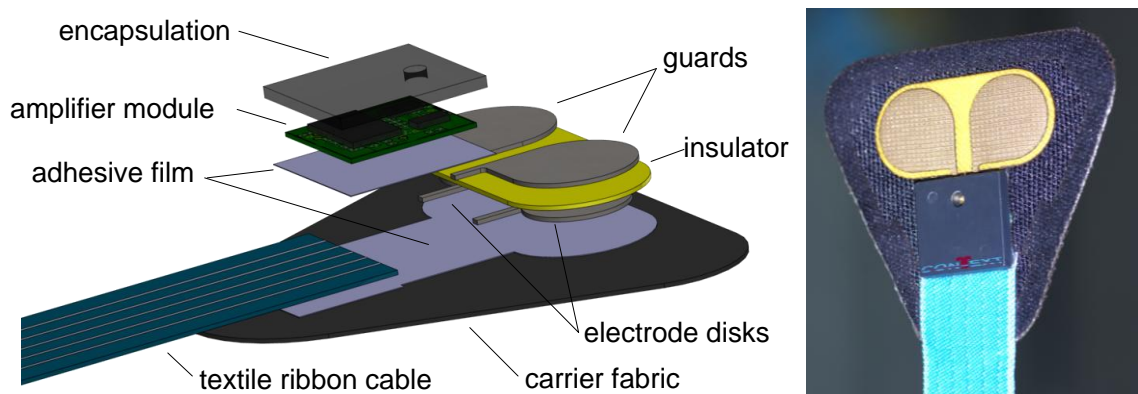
EMG Sensor developed in *ConText*: Exploded assembly drawing (left) and picture of sensor (right).
